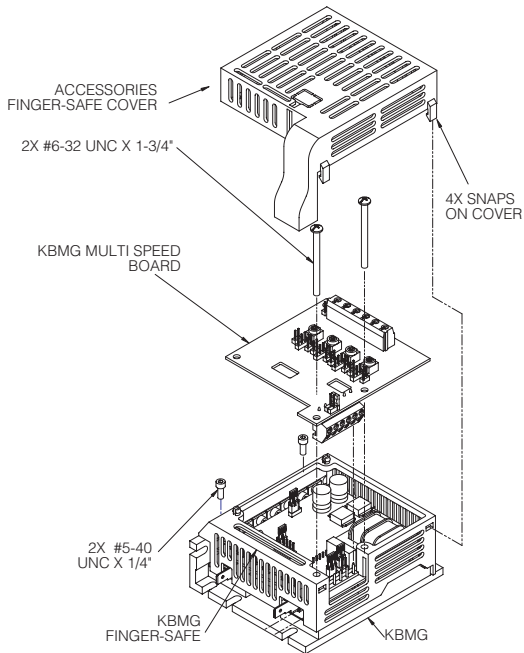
KBMG MULTI-SPEED BOARD & KBMG ASSEMBLY DIAGRAM
